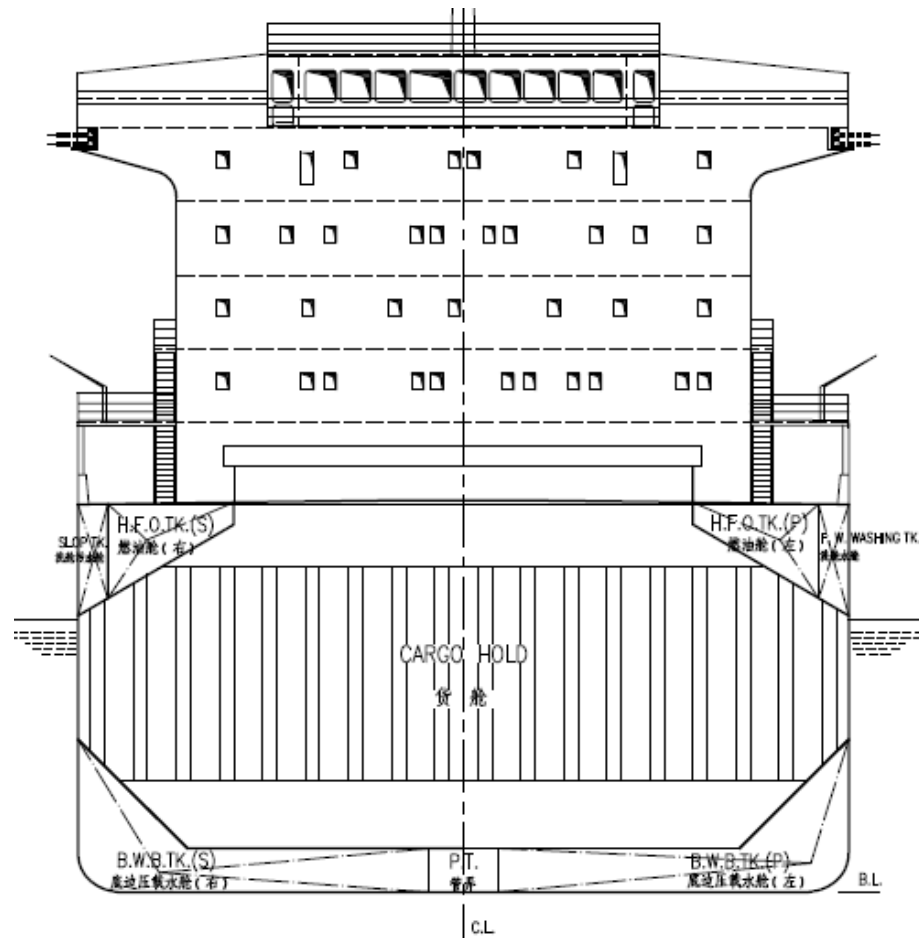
Cross-section of one of the largest cargo holds, which does not taper. The image shows the structure of the top wing tanks and the bottom tanks, with the latter stretching up the side somewhat. Image: Photograph courtesy of Owners of ALMIRANTE STORNI.
